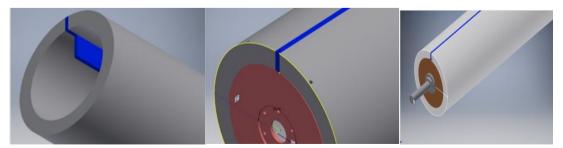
Inventor drawings of the mandrel for the inner field cage.
